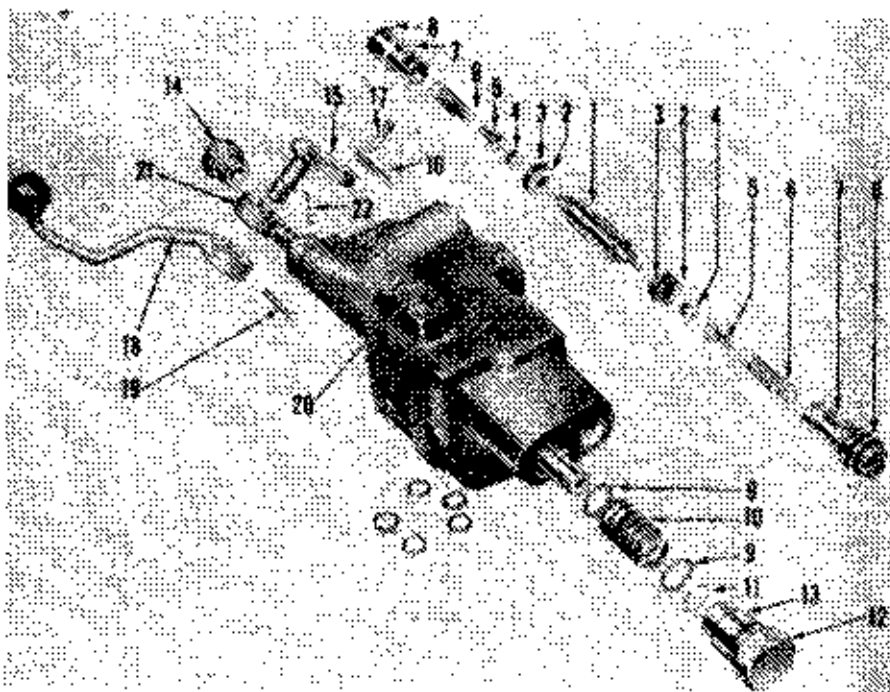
Exploded view of two-way remote control valve that was available as an accessory for model NAA tractors.
